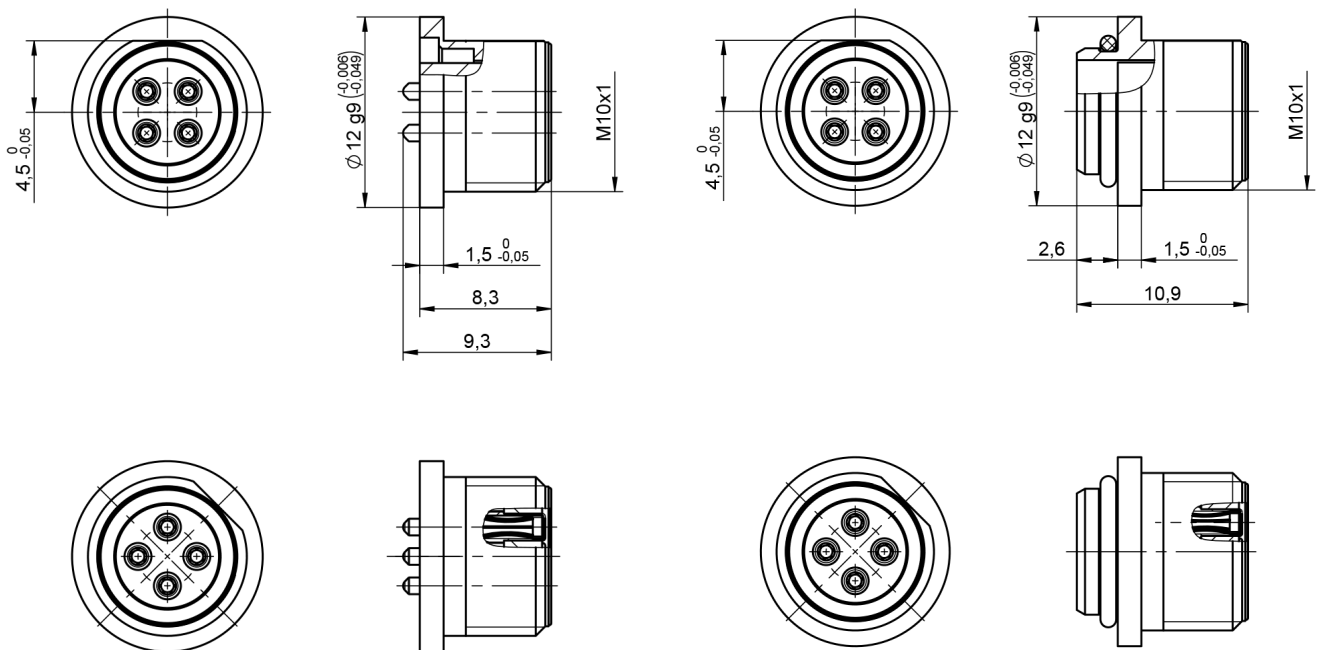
Positive contact element Type 1714C1 of Type 1714C0 for installation in mold insert
